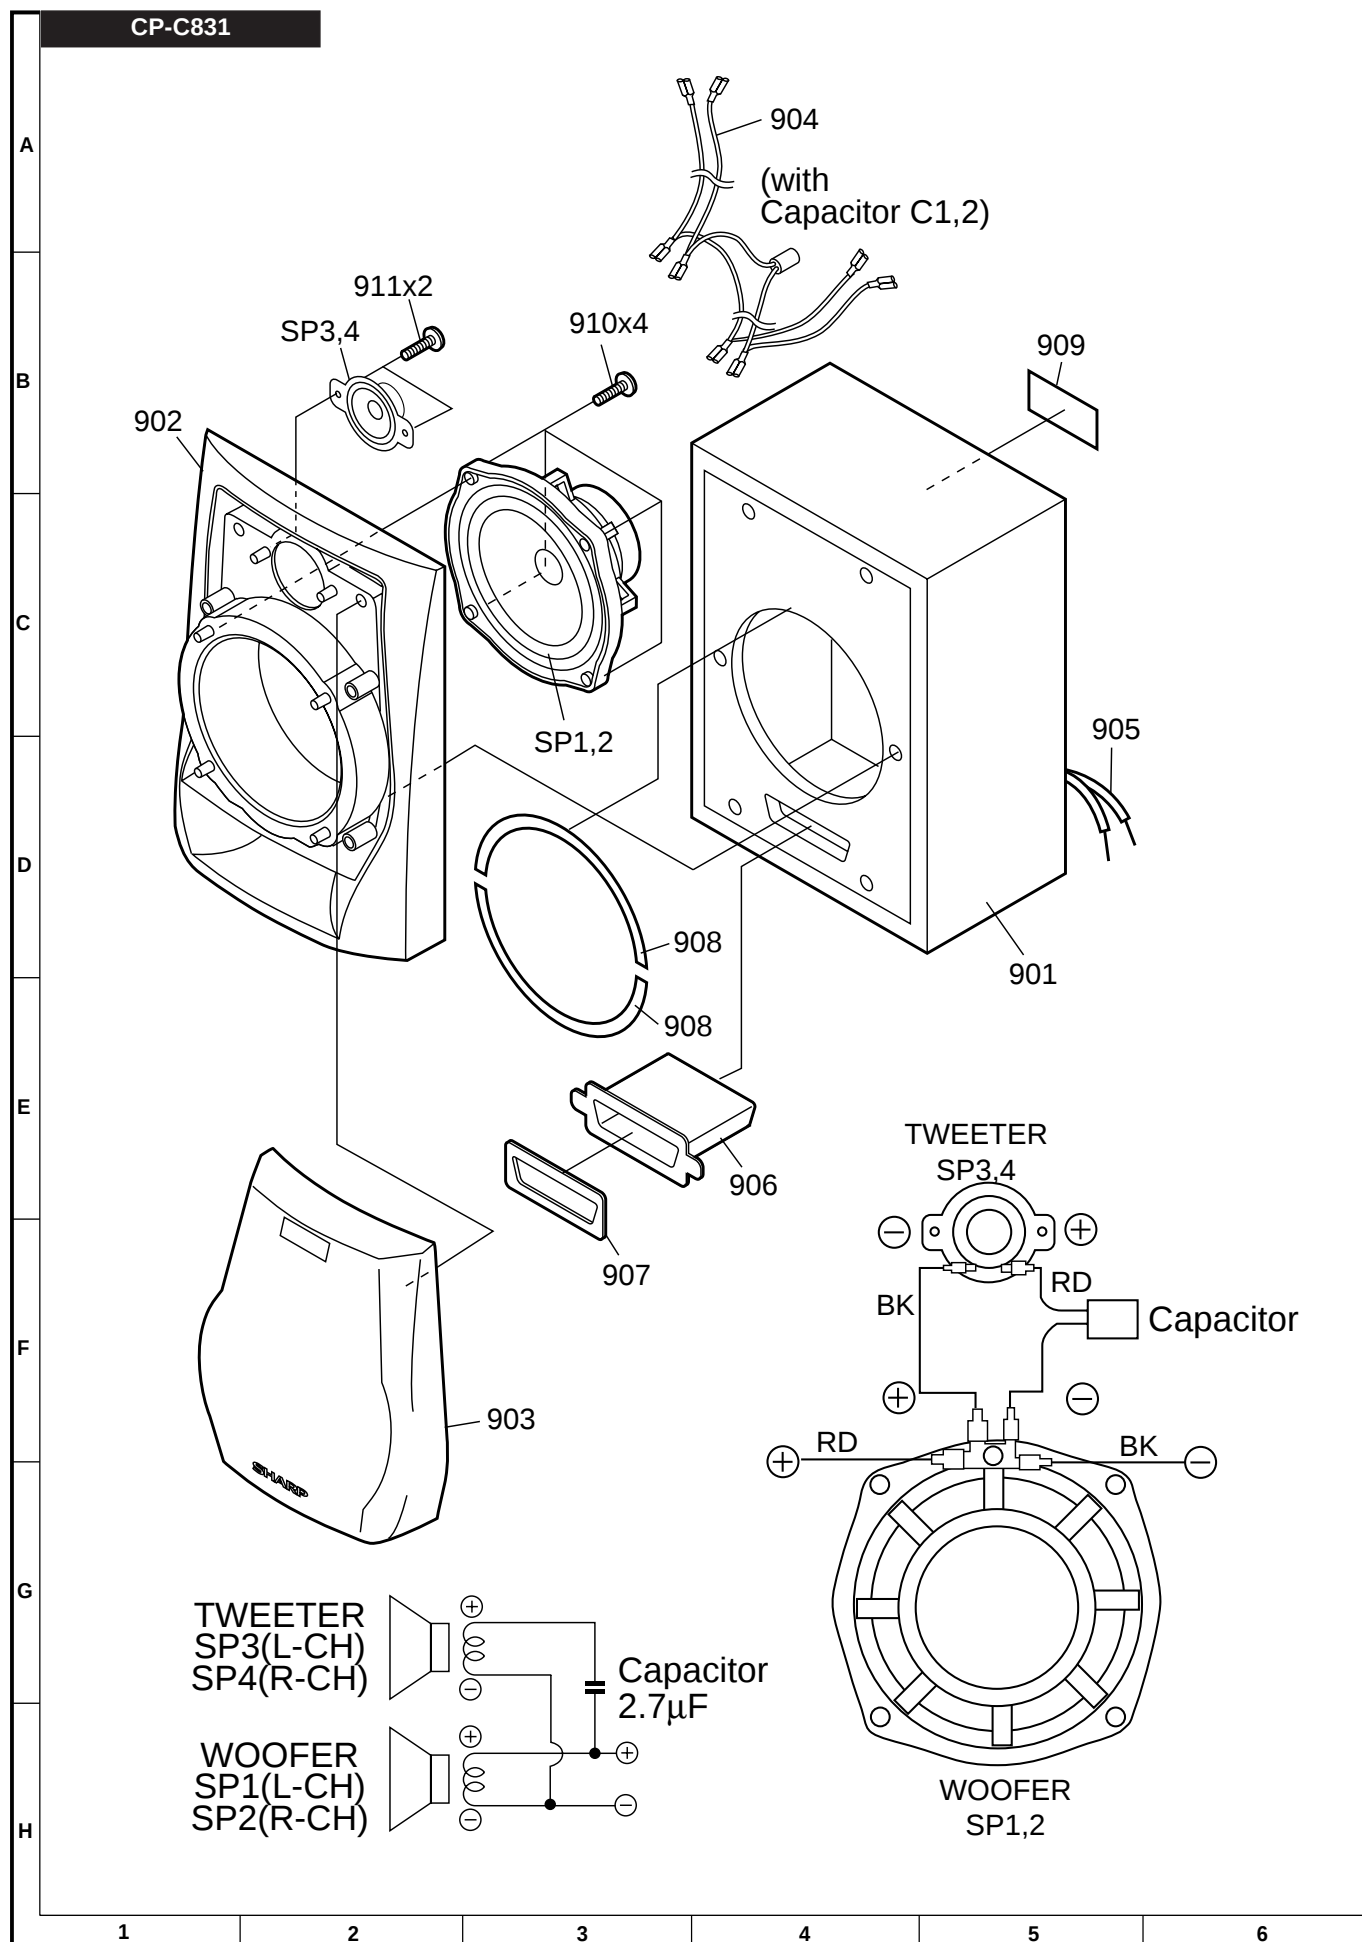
SPEAKER EXPLODED VIEW (1/2)
